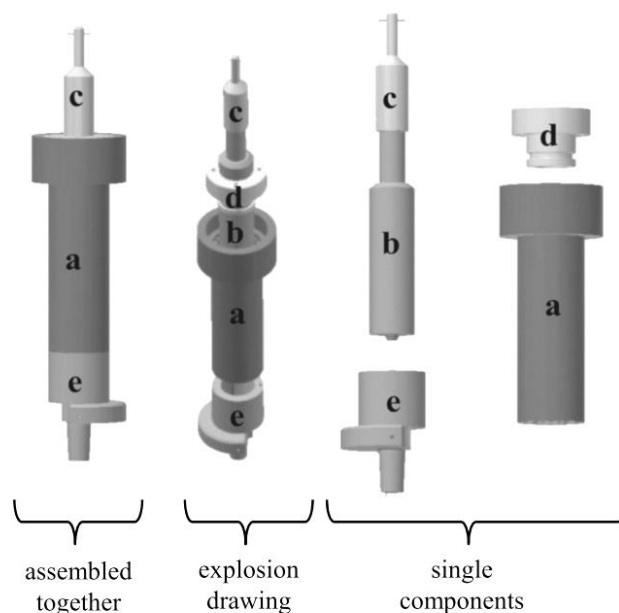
Design drawing of the Rheo-NMR measuring cell, a) outer cylinder, b) inner cylinder, c) coupling, d) bearing, e) heating adapter
